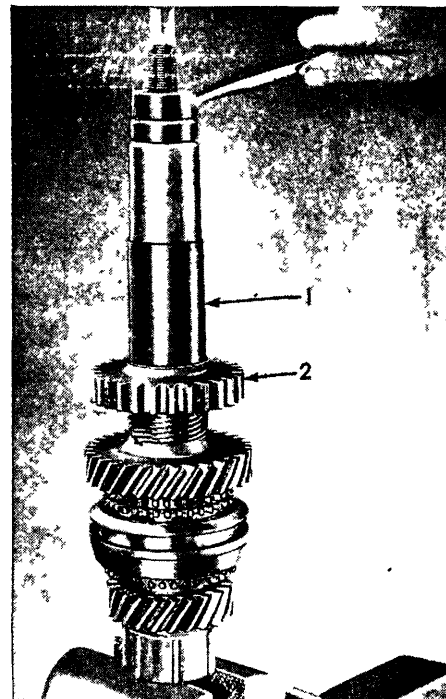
Installing reverse gear (2) with special tool and sleeve (1). 1941-42 vacuum-operated transmission
